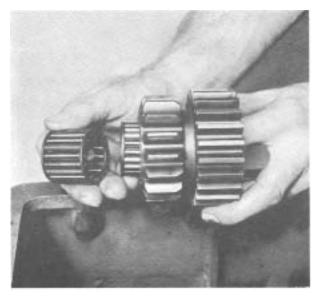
Insert two reverse idler gear bearings in idler gear.
